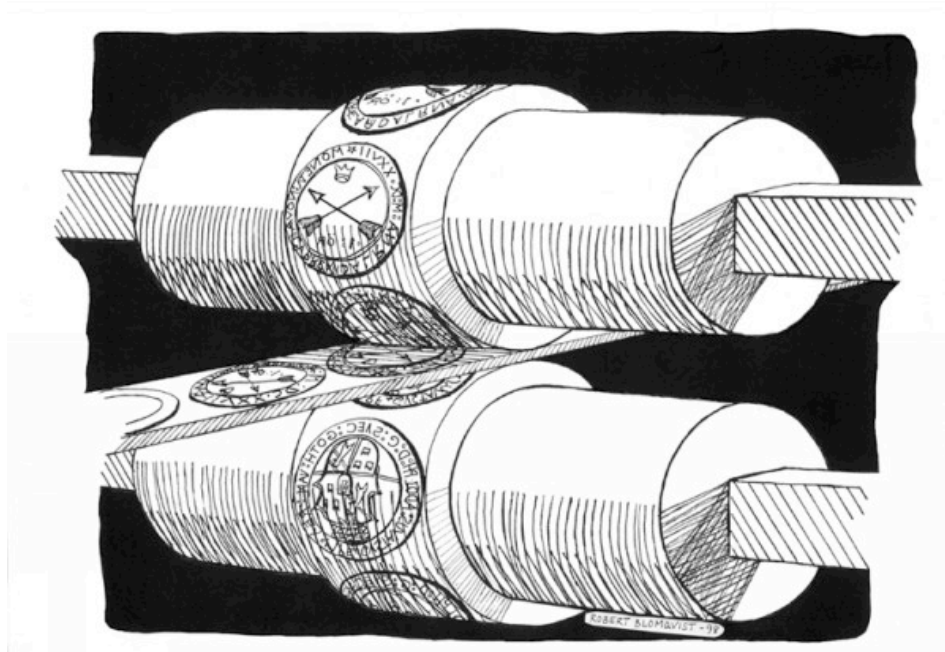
Equipment for rolling mill method, Courtesy of Vasamuseet.
